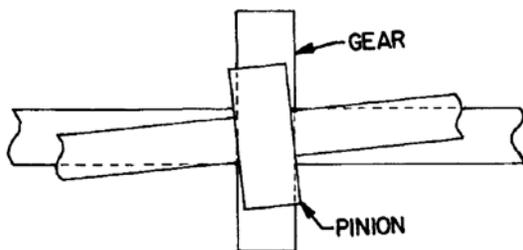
Out of parallel shafts cause cross bearing in the gear set
